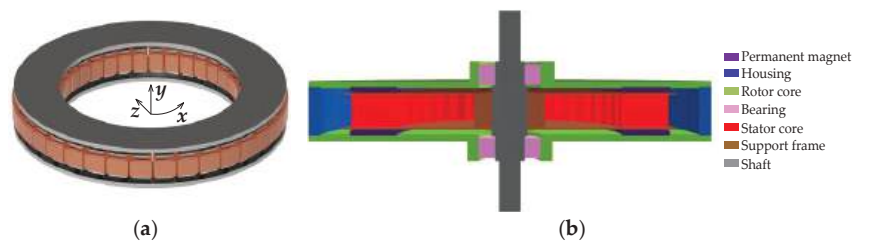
Structure of the YASA machine: (a) 3-dimensional structure; (b) view of the cross-section.
